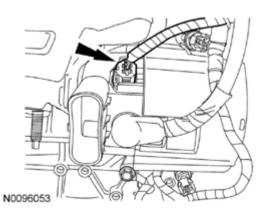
Locating Generator Electrical Connection Courtesy of FORD MOTOR CO.
